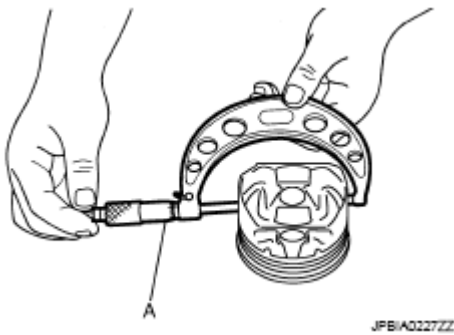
Measuring Outer Diameter Of Piston Skirt
